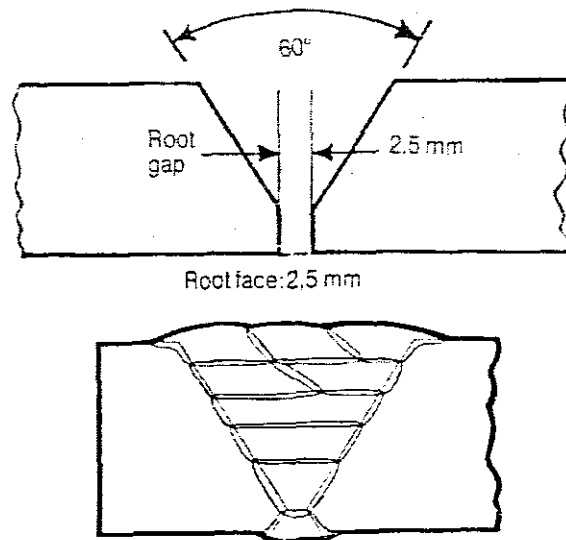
Depicting Single Butt weld geometry (from Afrox Welding Consumables Catalogue.)
